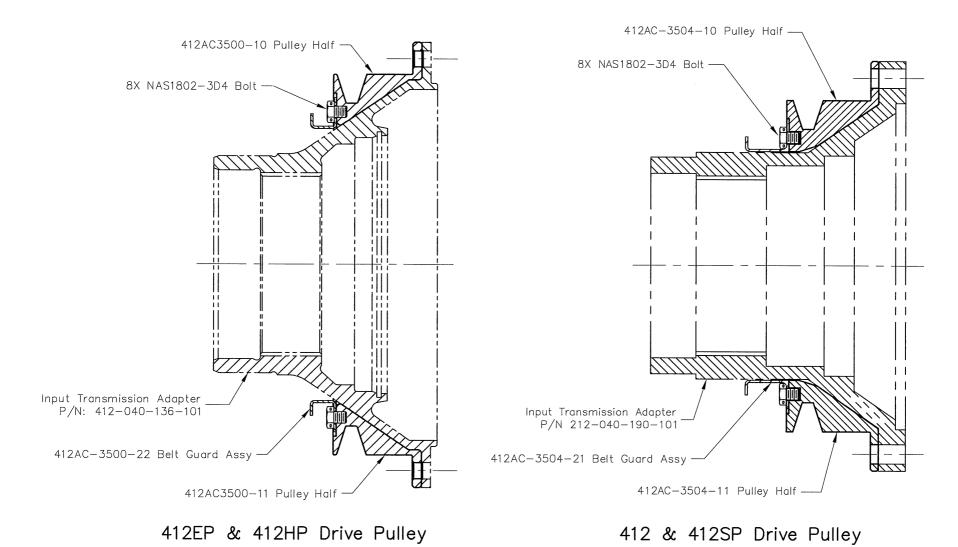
, 412AC-3500 & 412AC-3504 Drive Pulley Belt Guard Installation
